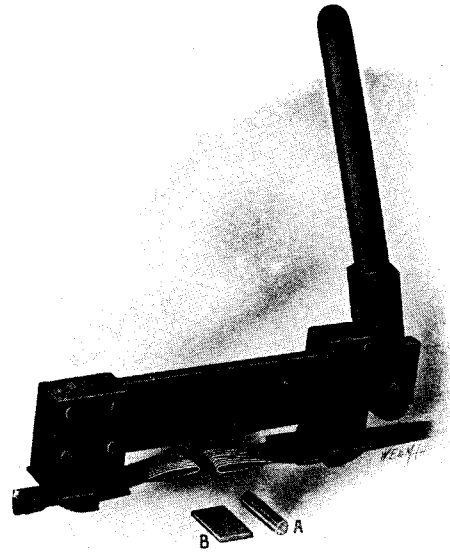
TOOL FOR ASSEMBLING SECTIONAL BAND, OPEN POSITION
